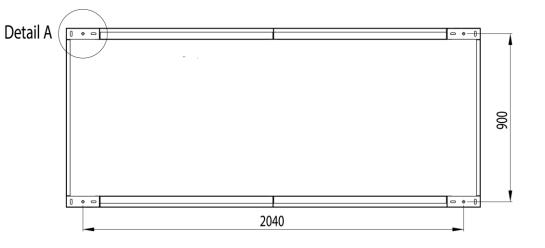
Evaporator dimensions: Heat pump VHS 80 with AIR 80 C13A (in mm)
